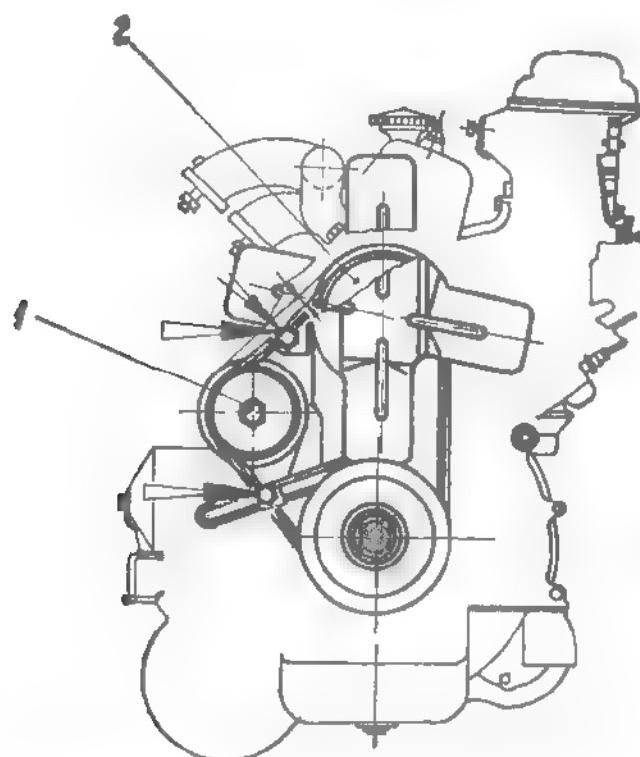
ADJUSTING THE FAN V-BELT STRETCHING
